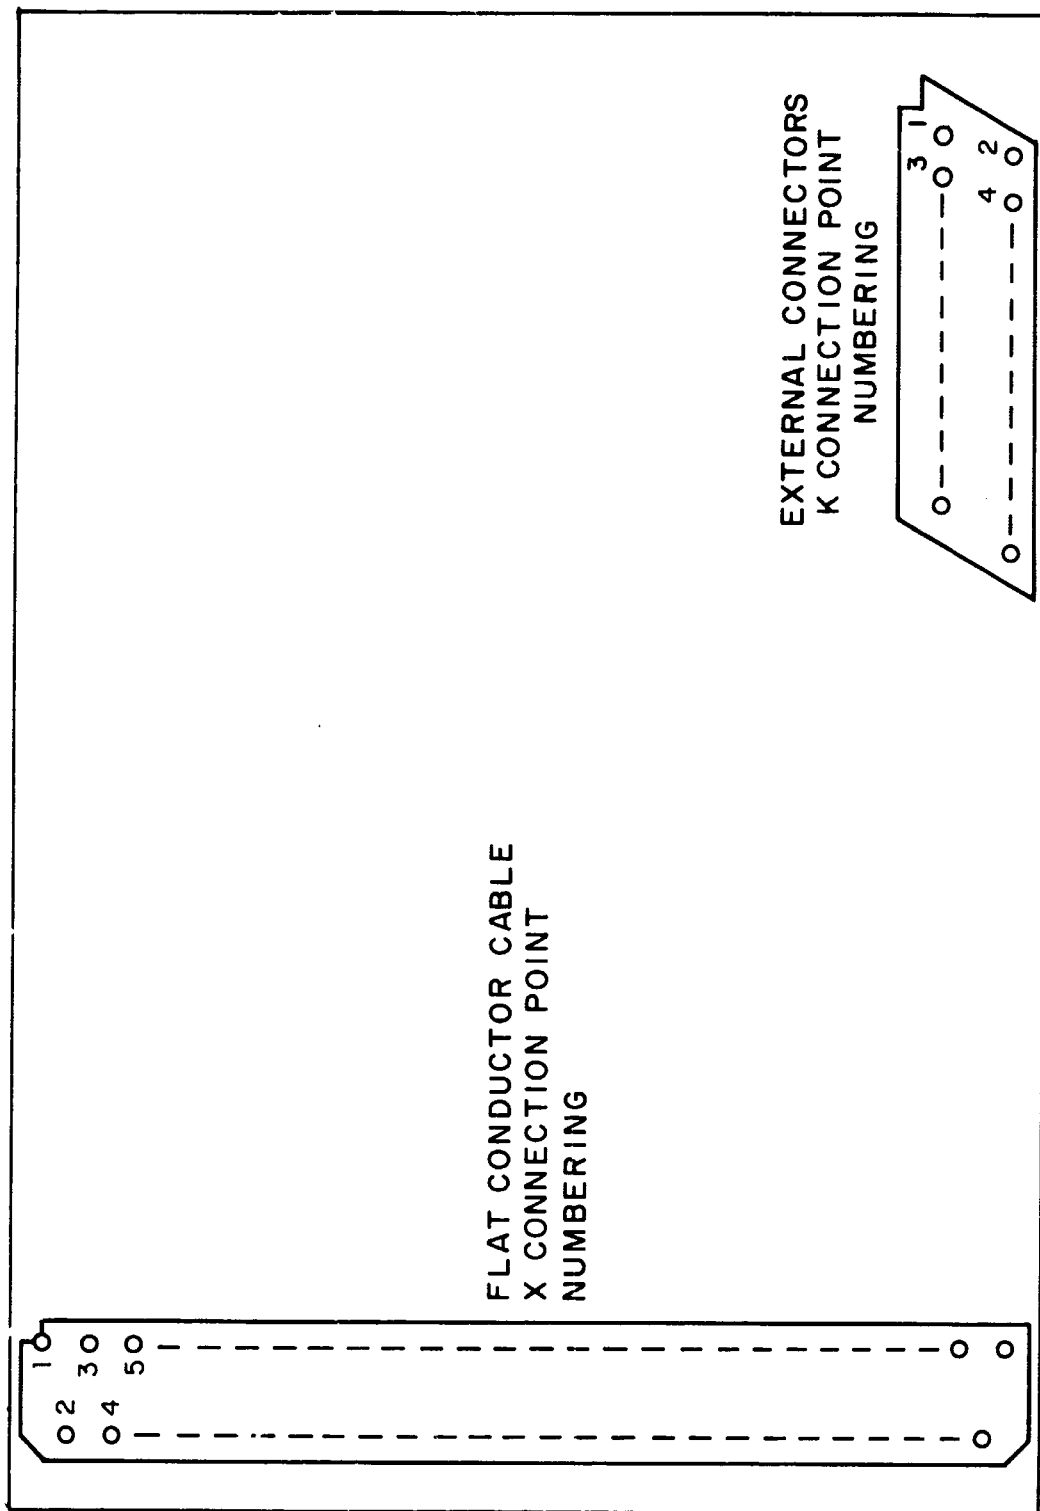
Board Terminal Numbering for External Connectors and Flat Conductor Cable
